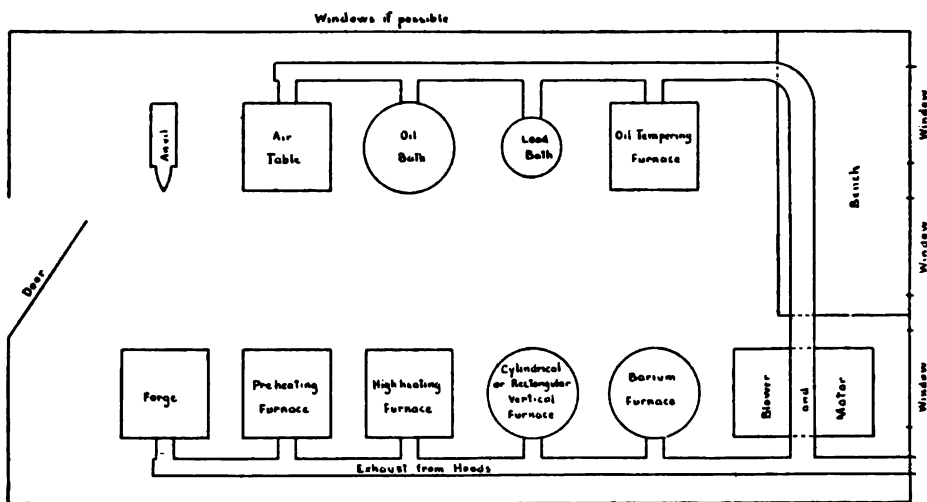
Layout of hardening room of capacity sufficient for hardening all the tools used in a large manufacturing plant.
